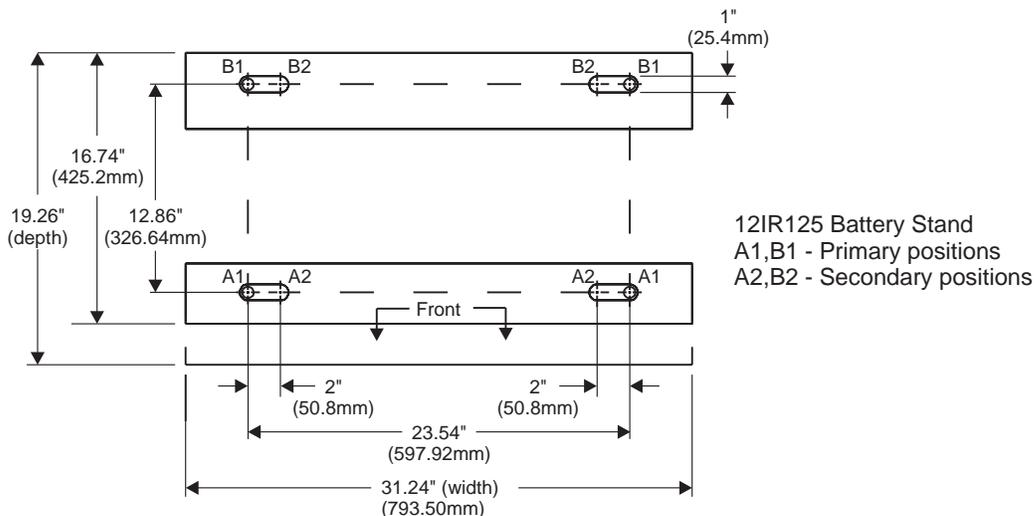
B: 12IR125 Battery Stand Mounting Footprint
